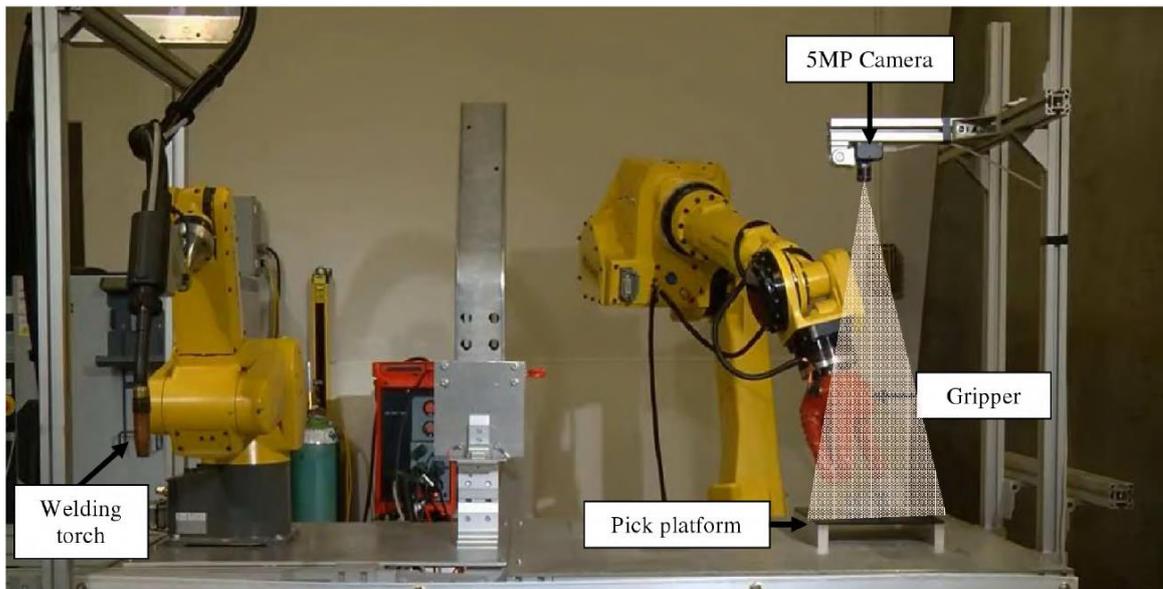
Jigless multirobot welding cell concept (Paquin and Akhloufi 2012, p. 69).
